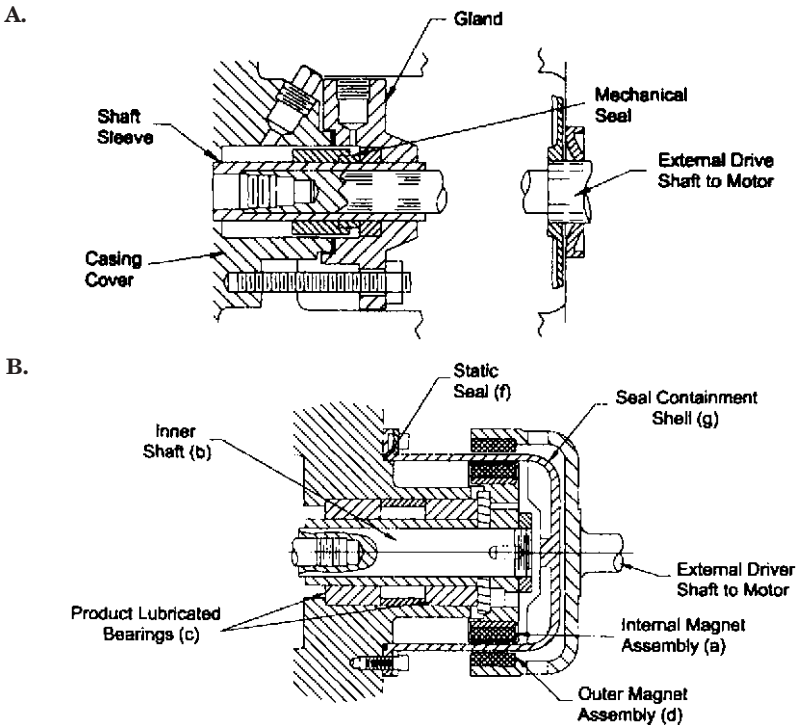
Comparison of typical mechanical seal arrangement and sealless pump drive configuration: a) arrangement for typical mechanical through casing cover; b) sealless drive configuration
